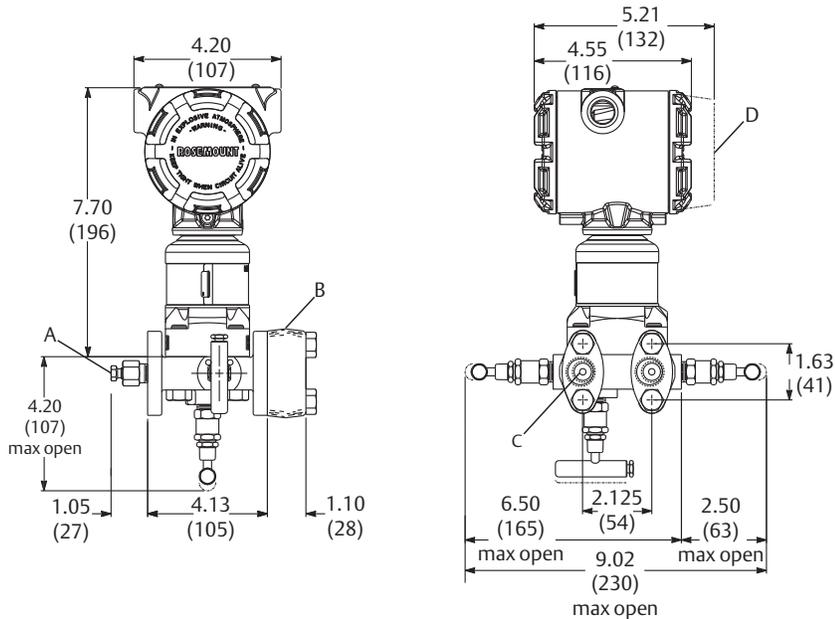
Rosemount 305RM 2-Valve Traditional Style Manifold
